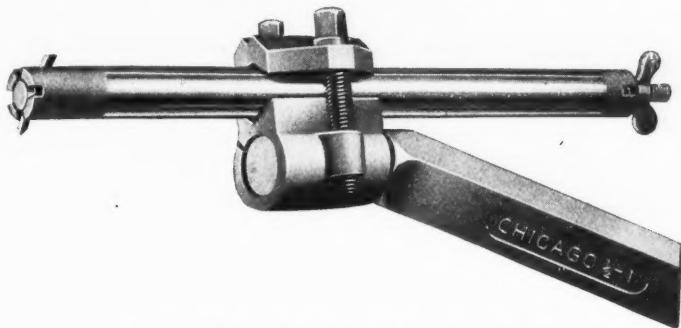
Chicago Boring Tool Holder with Boring-bar in Place.
